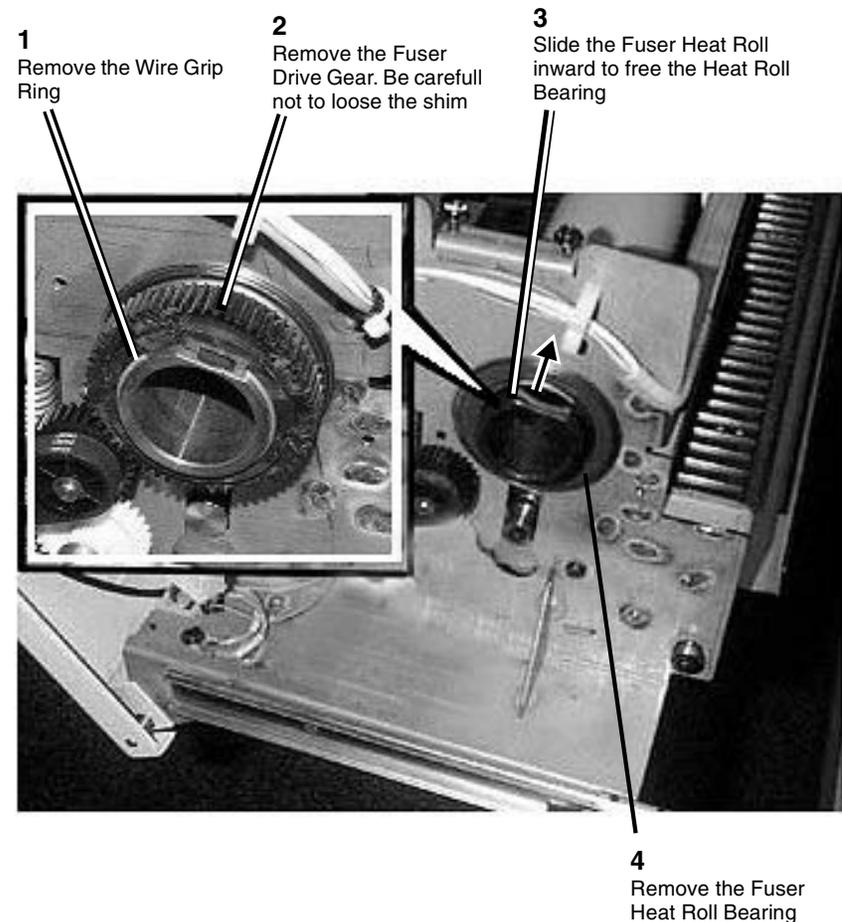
Removing the Fuser Heat Roll Drive Gear and Bearing (right side)
